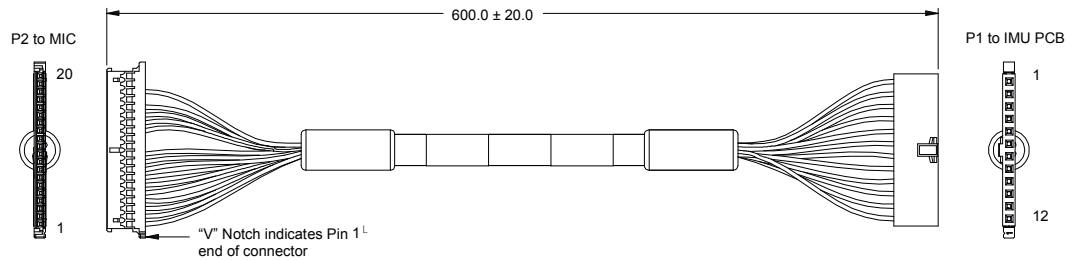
HG1700 and HG1900 IMU-to-MIC Cable Assembly
